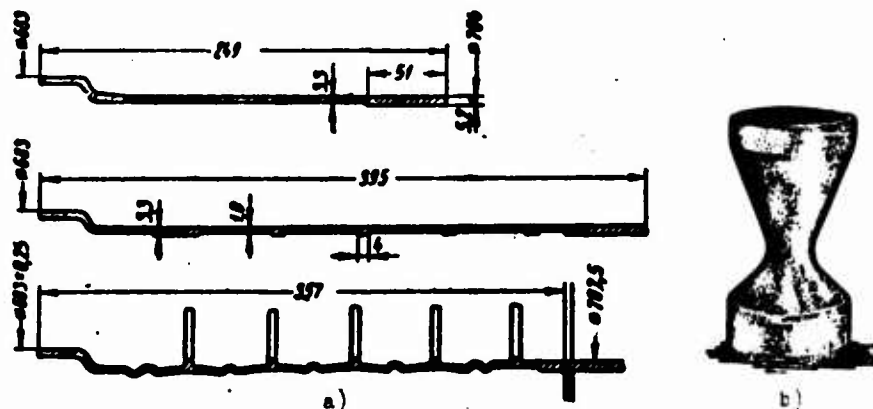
Diagram of process of extrusion from a blank of tubular form: a) housing of crankcase; b) nozzle of molybdenum pipe.
